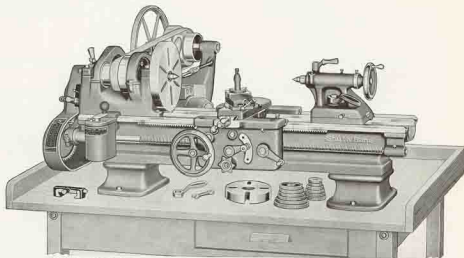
Cat. No. 410-A, 11" x 6" Series "R" Standard Change Gear Horizontal Motor Drive Lathe complete as shown....\$453.00
